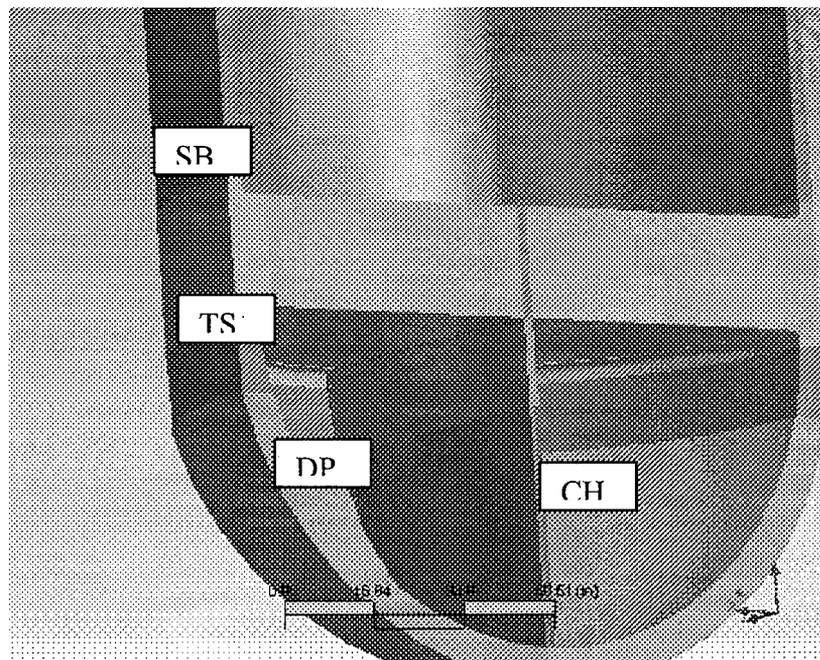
Typical Lower Complex Arrangement for Westinghouse Model SG. SB = Stub Barrel, TS = Tubesheet, DP = Divider Plate, CH = Channelhead.
